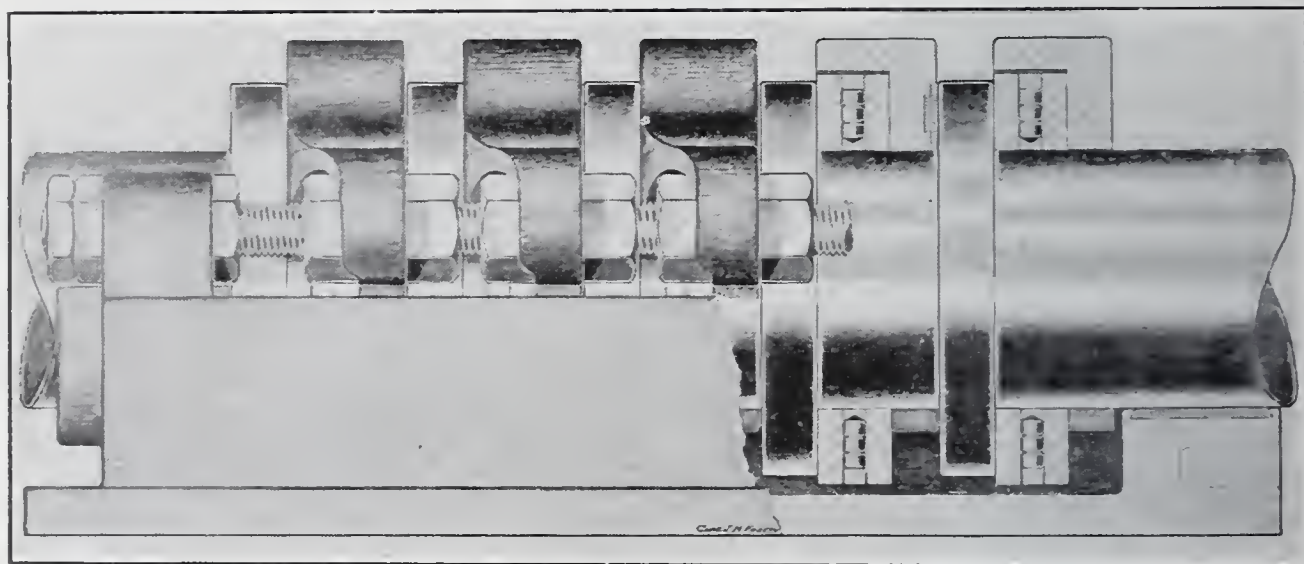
ROLLER THRUST PROPELLER BEARING AND SHAFT.
